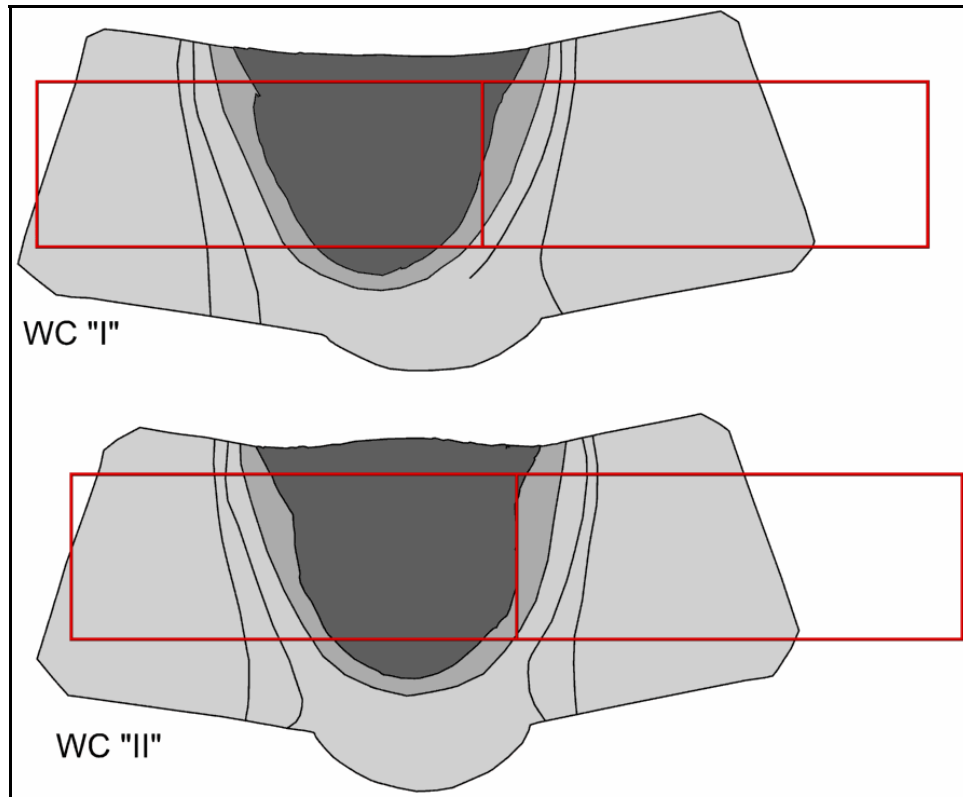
CVN Specimen Outlines Superimposed on Weld Coupon Cross-Section Profiles
